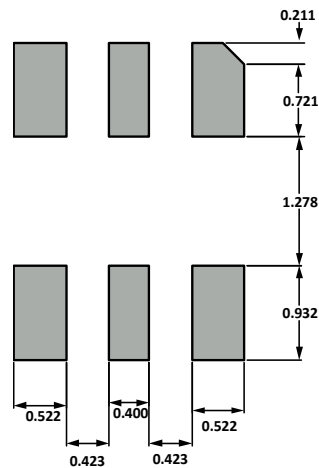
Recommended Solder Paste Stencil Pattern Layout
